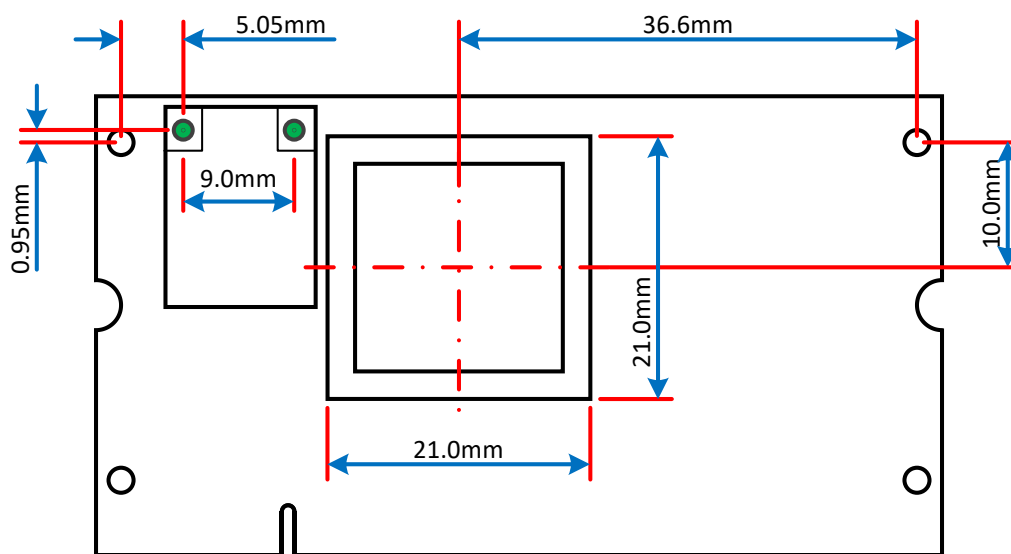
Mechanical position of SoC and Wi-Fi module (top view)
